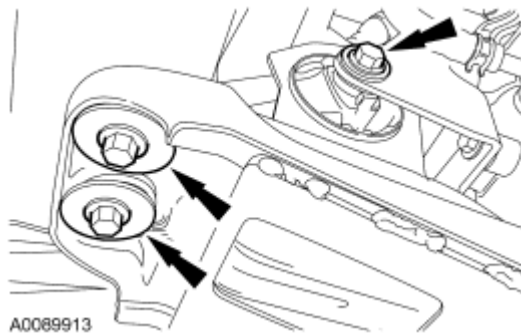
Identifying Front Roll Restrictor Bolt & Bolts For Engine Support Crossmember
